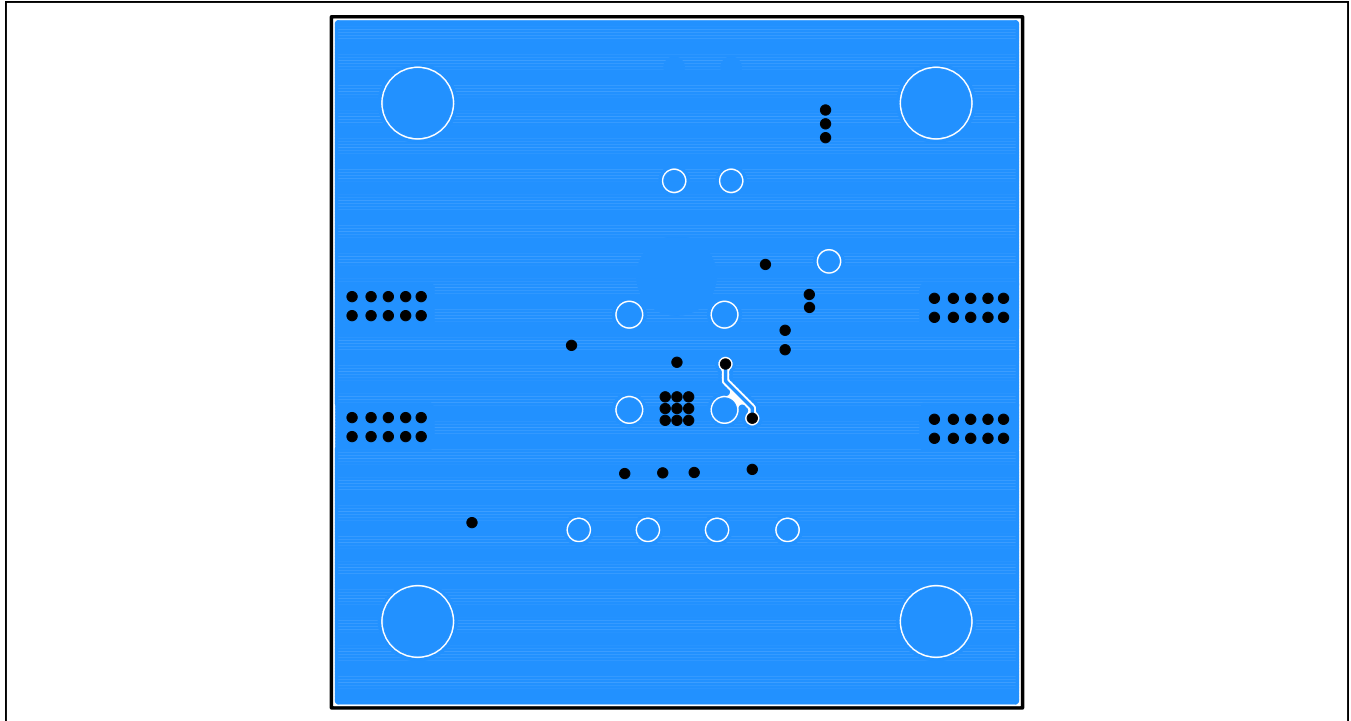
MAX2181 EV Kit PCB Layout—Bottom Copper
